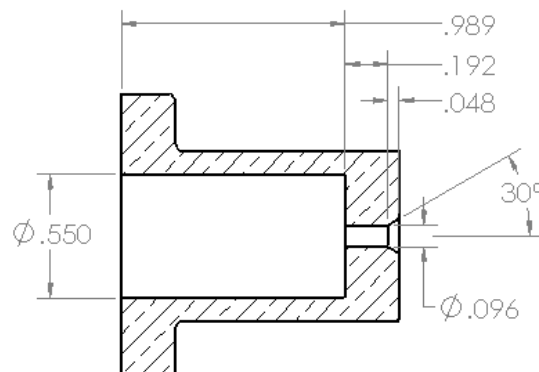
Schematic of the ‘2EC’ nozzle (all dimensions are in inches)
